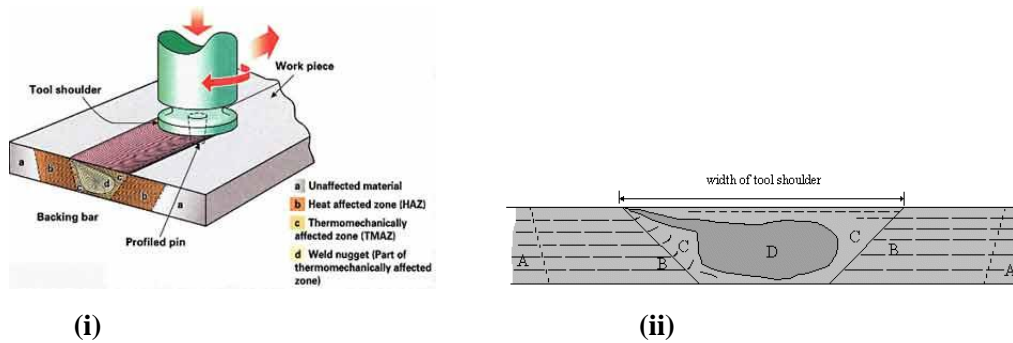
Different regions of welded zones. Ref. (i) <http://www.twi.co.uk>, (ii) <http://materialteknologi.hig.no/Lettvektdesign/joining%20methods/joining-welding-friction%20stir%20weld.htm>
